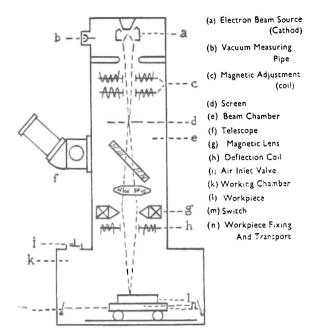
Schematic diagram of Electron Beam Welding Equipment.
